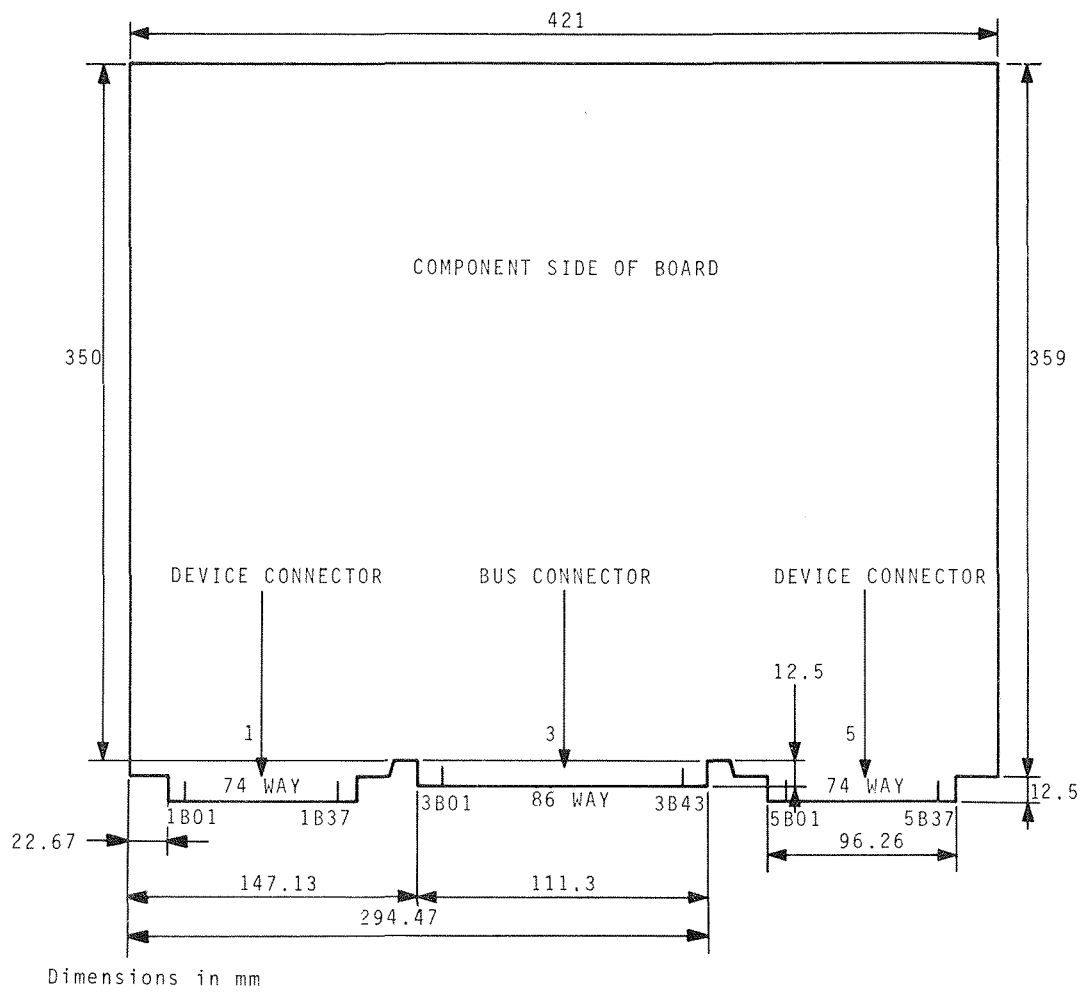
Control Unit Board Dimensions (Double CU Board)
